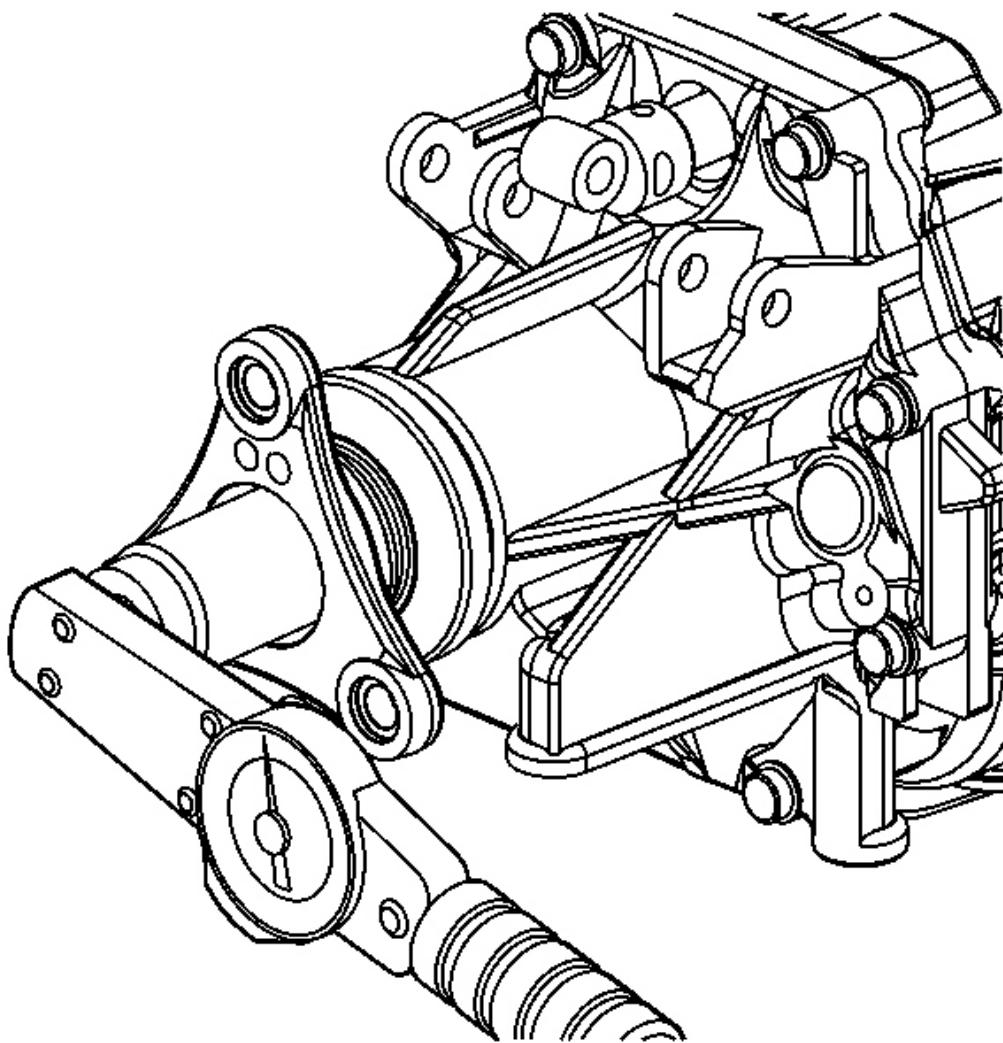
Measuring Rotational Torque/Drag Torque Of Propshaft Flange
